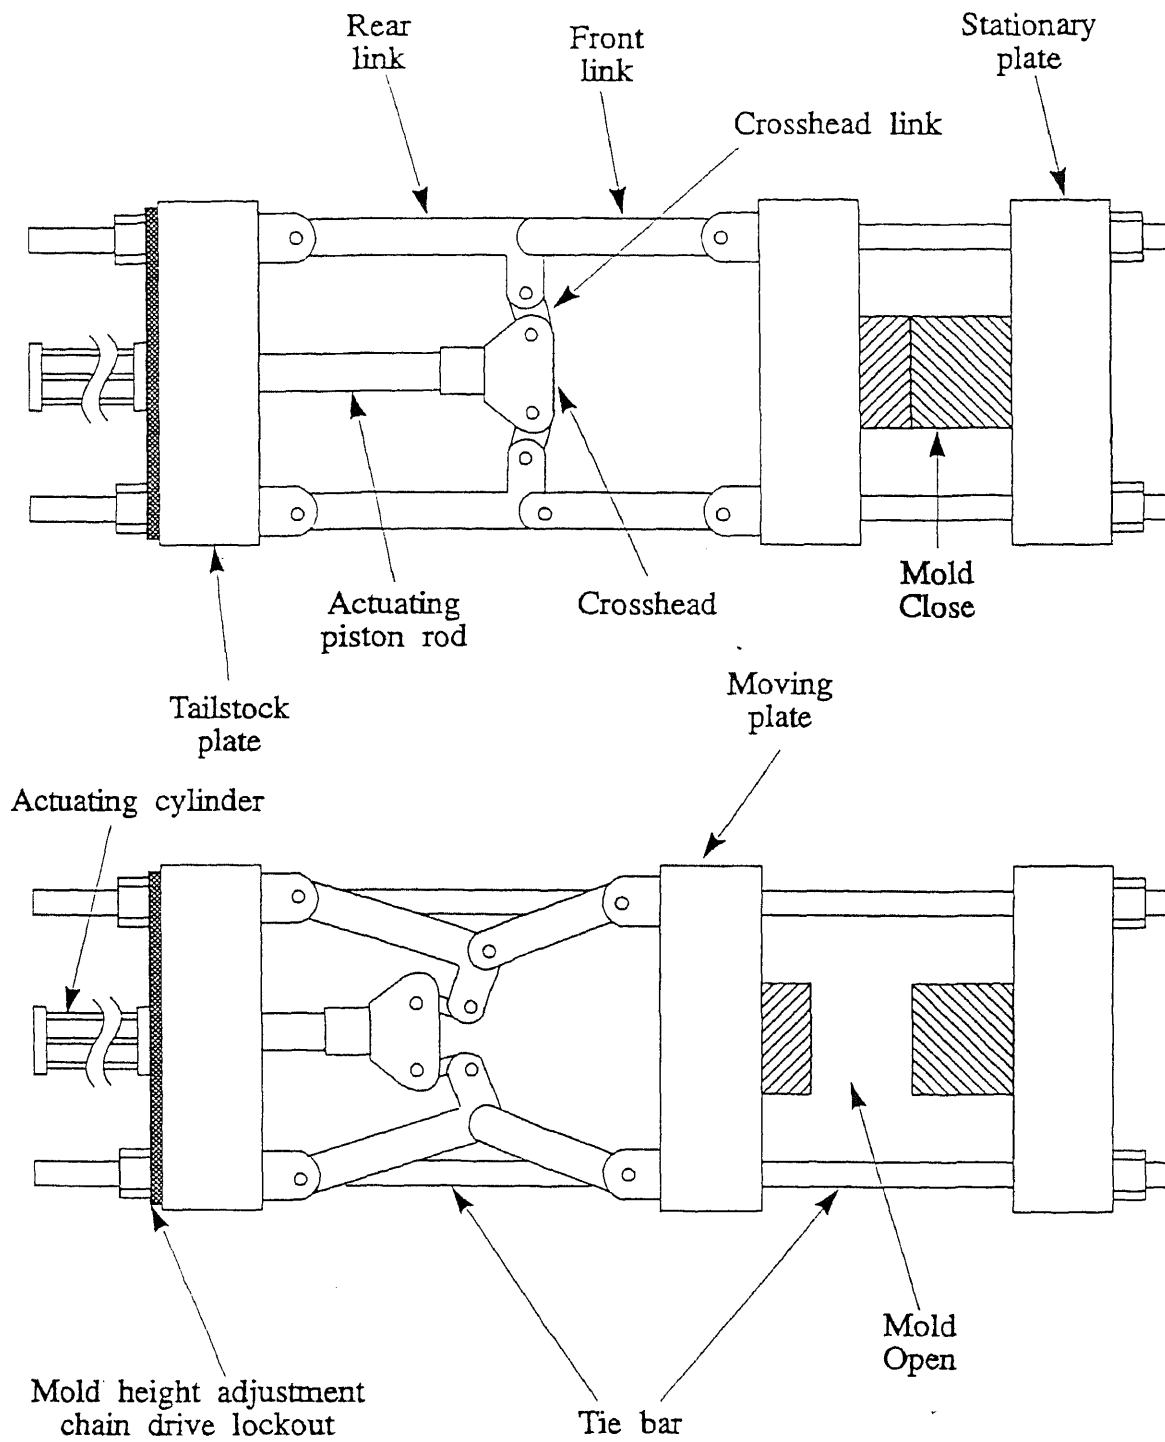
Drawing of a typical double toggle acting clamping unit.
